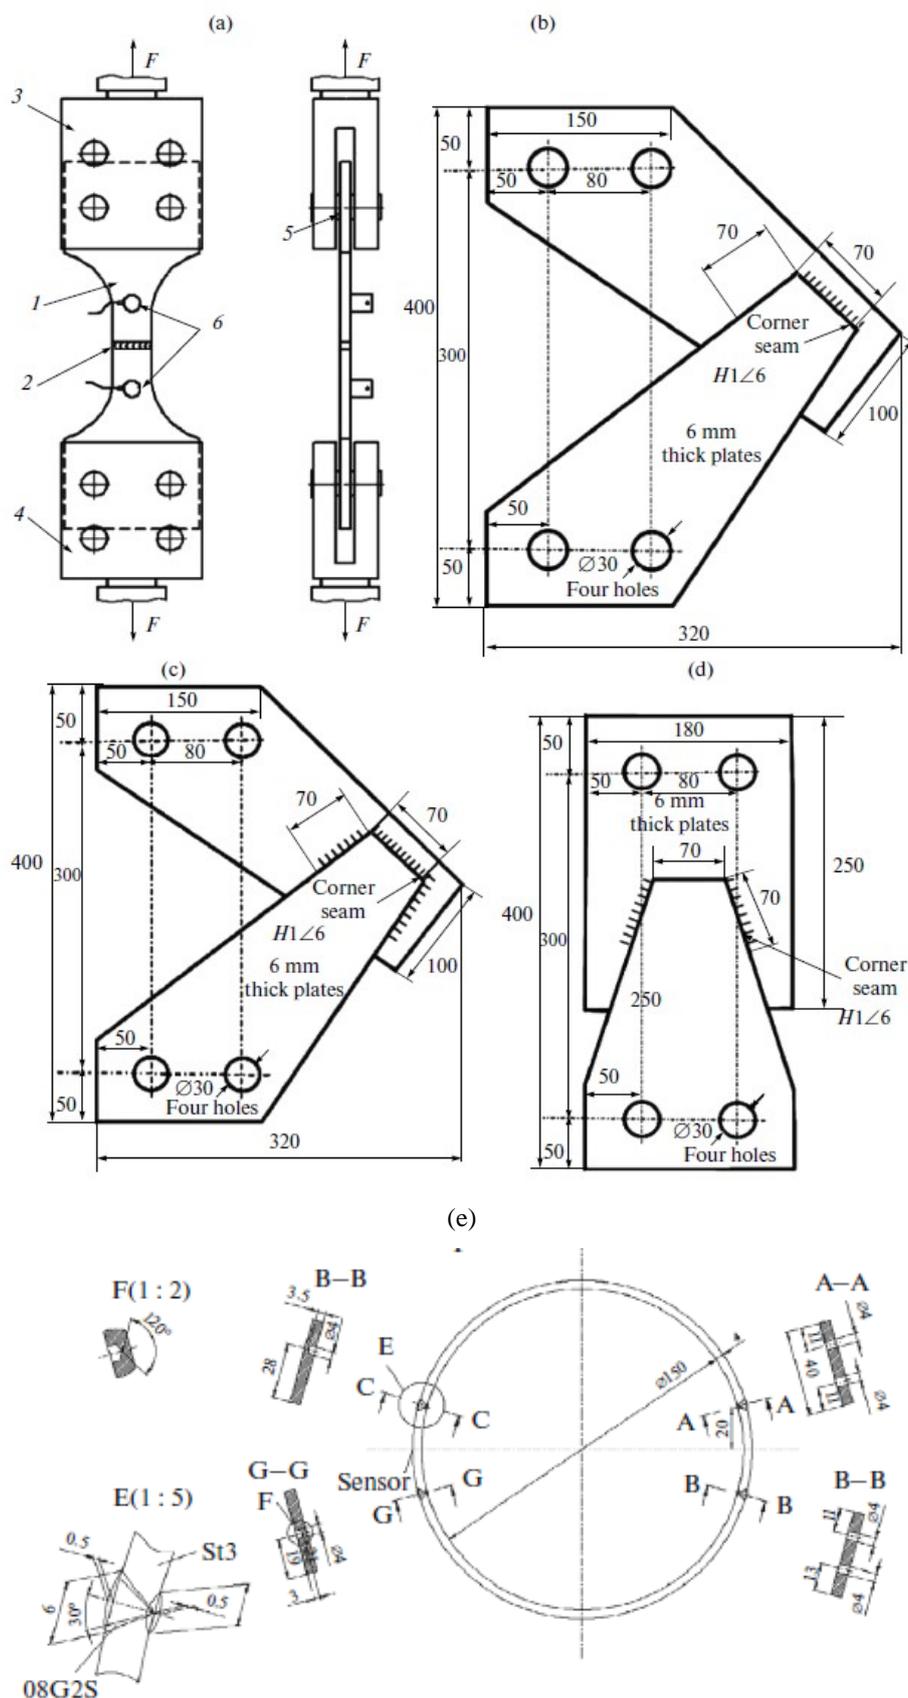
Test samples with different shapes, types of loading and degree of imperfection: a) butt where 1- sample, 2-weld, 3-top grip loading device, 4-bottom grip loading device, 5-thumb, 6- Sensors of AE; and b), c), d) -lap-welded joints e) ring welded sample
